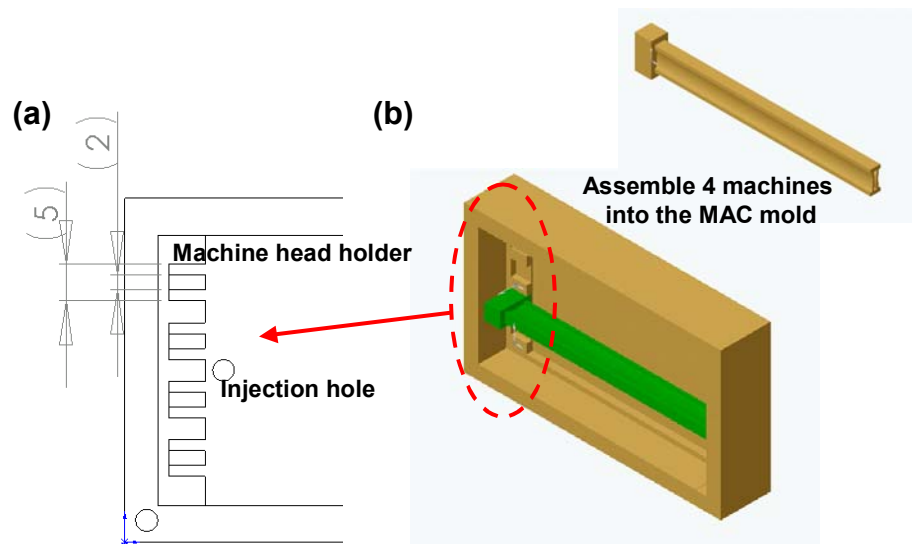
(a) Detailed view of machine holder portion (b) assembling the HG machine.
